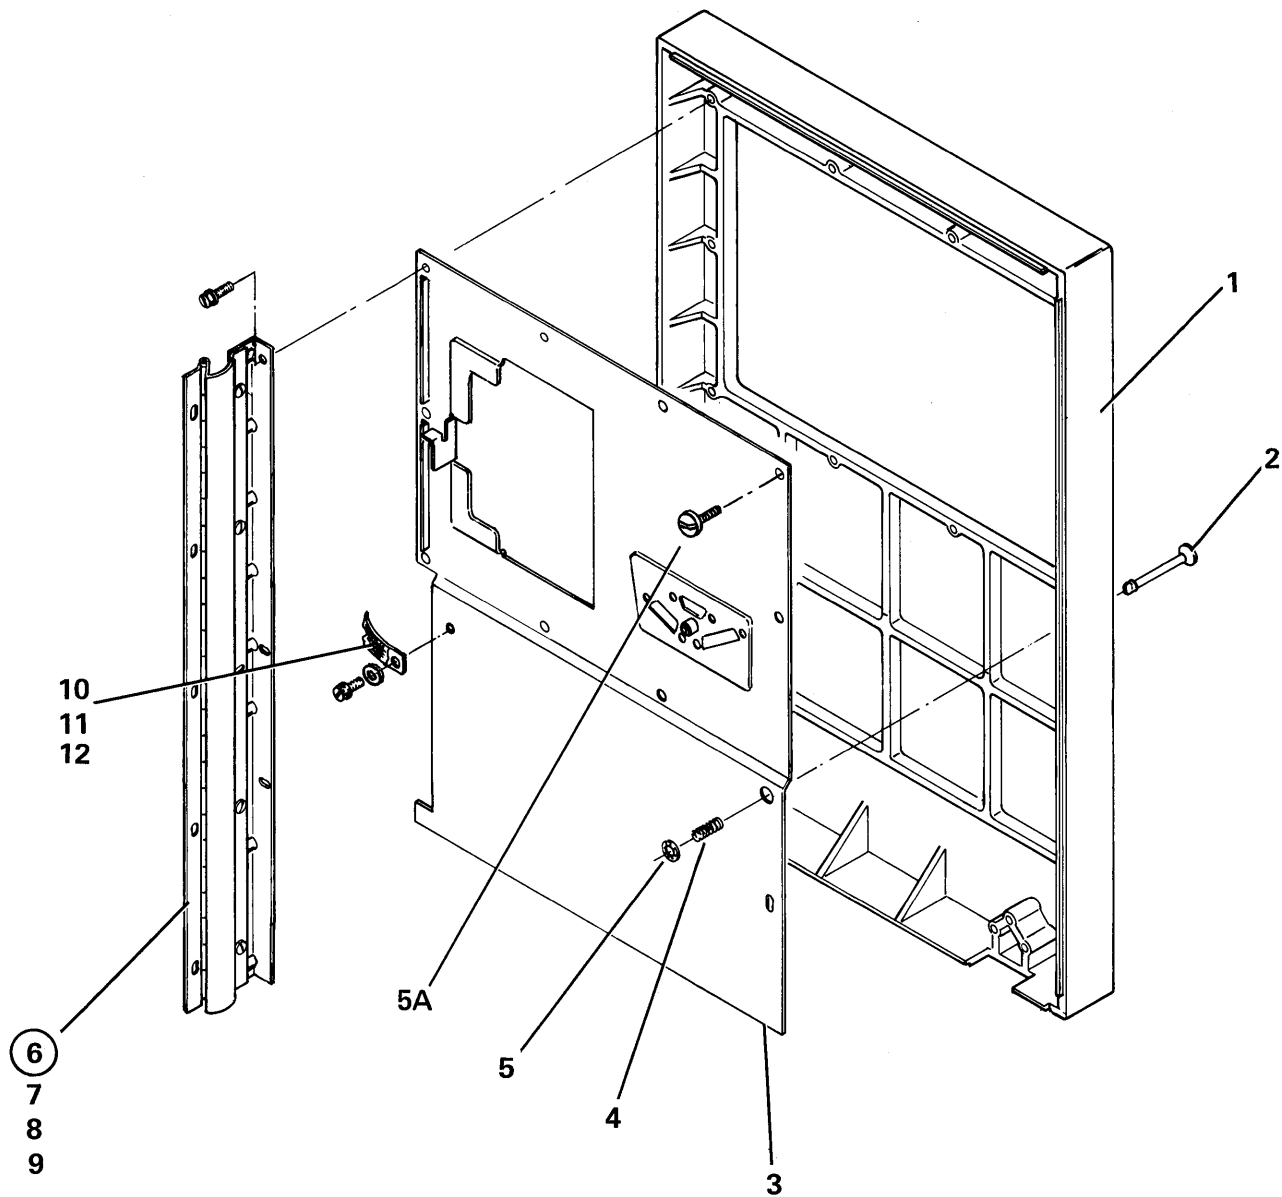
A. REAR DOOR ASSEMBLY. SEE LIST 3A.
